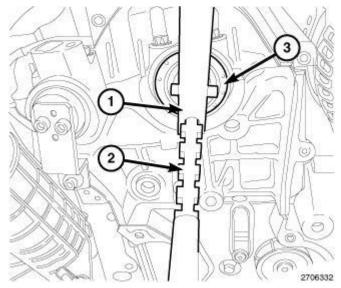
SEAL REMOVER & SEAL Courtesy of CHRYSLER LLC
